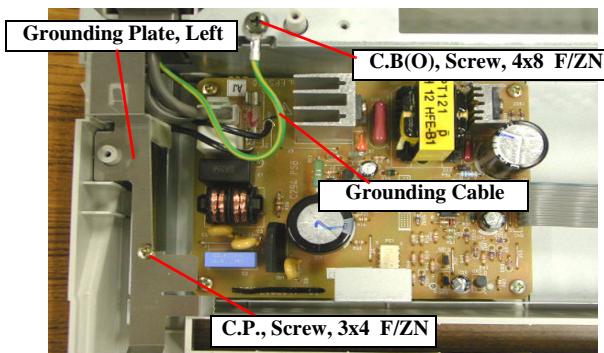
Ground Plate and Cable Removal (LX-1170II)
